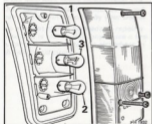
Rear lamp - Direction indicator (1), reversing (2), stop/tail (3)
